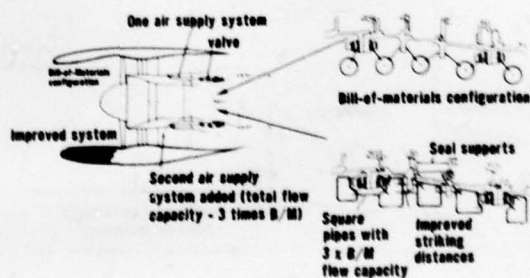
JT9D-70/59 Improved High Pressure Turbine Active Clearance Control
